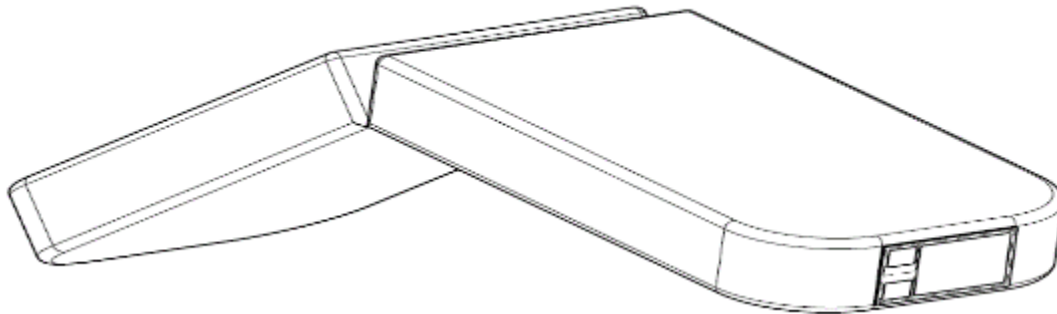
ICE BRICK BELT ASSEMBLY
